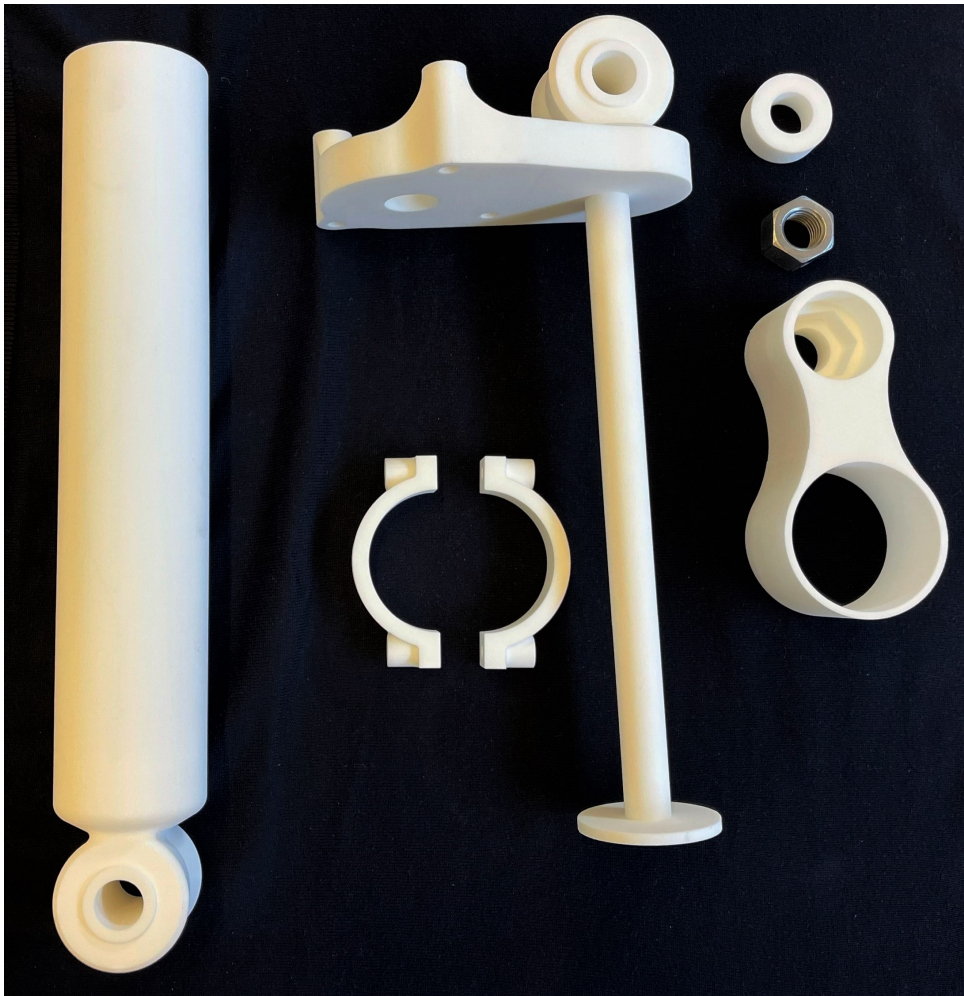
Photograph of the 3D printed parts, before assembly of physical prototype
